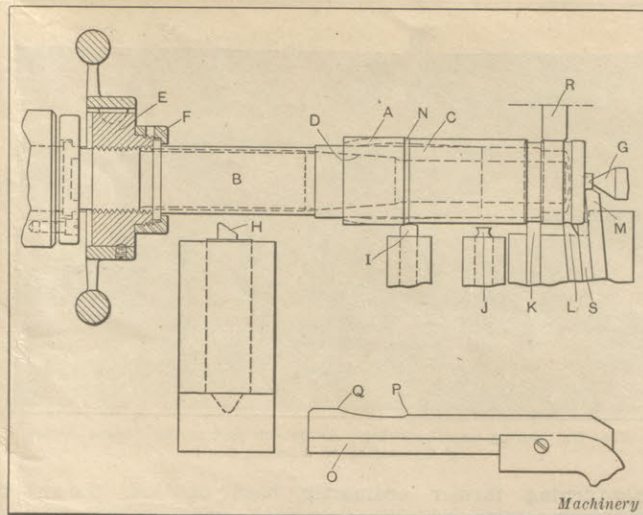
Diagram showing Method of holding and performing First Series of Operations on Forged Shells on "Lo-Swing" Lathe
